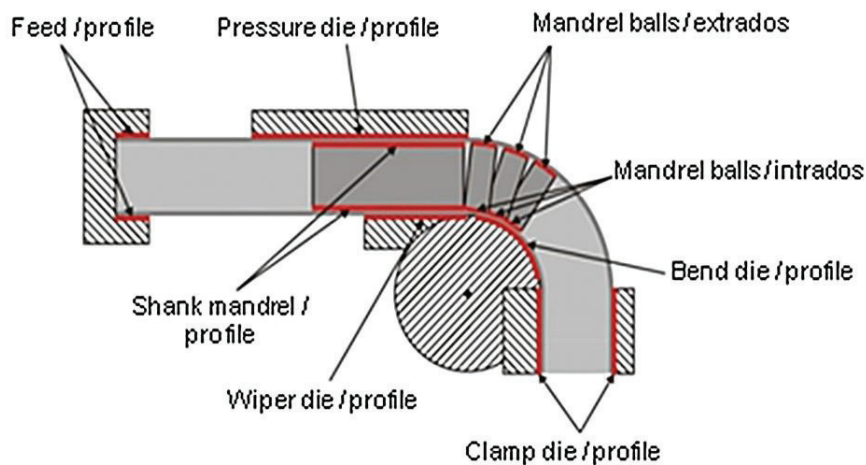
Basic arrangement of the toolset for rotary draw bending.
